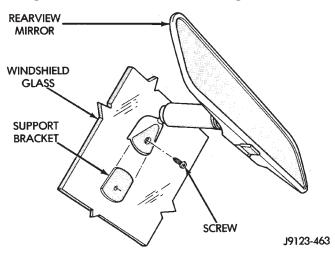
Interior Rearview Mirror Setscrew Removal/ Installation
